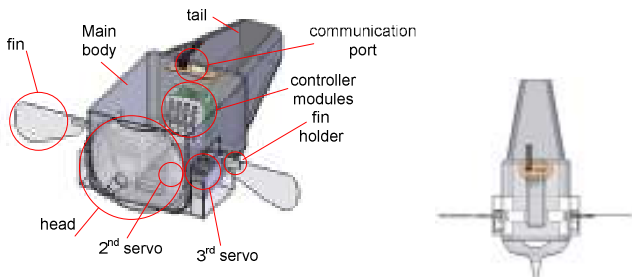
Mechanical design of fish robot: isometric and top viewed
